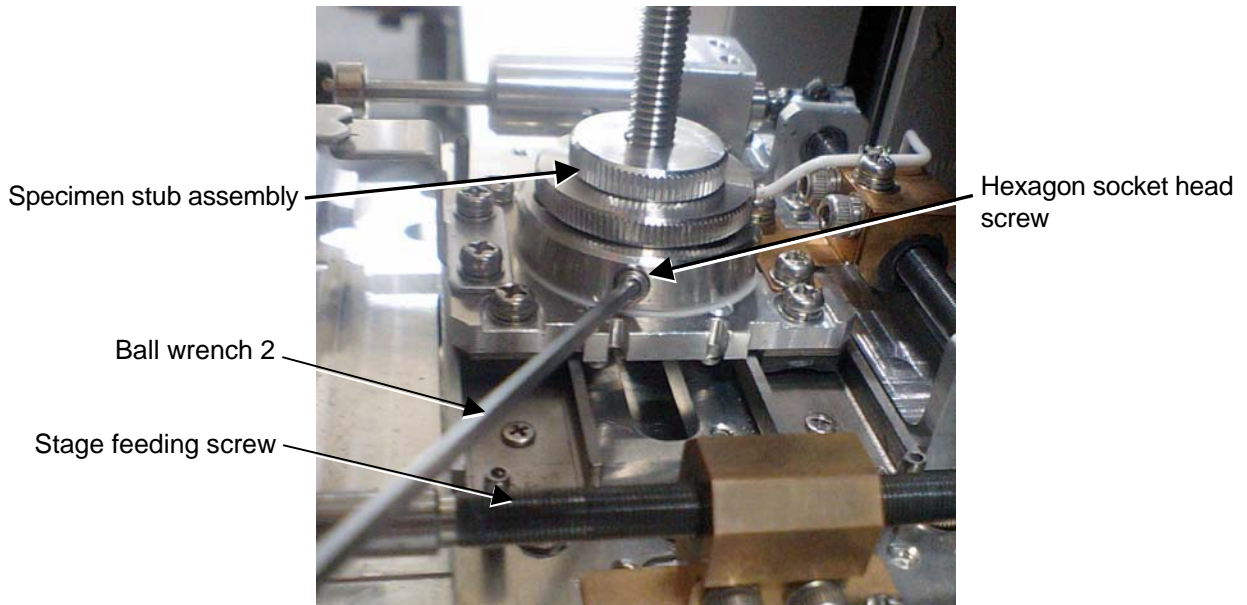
Hexagon Socket Head Screw for Fixing the Specimen Stub
